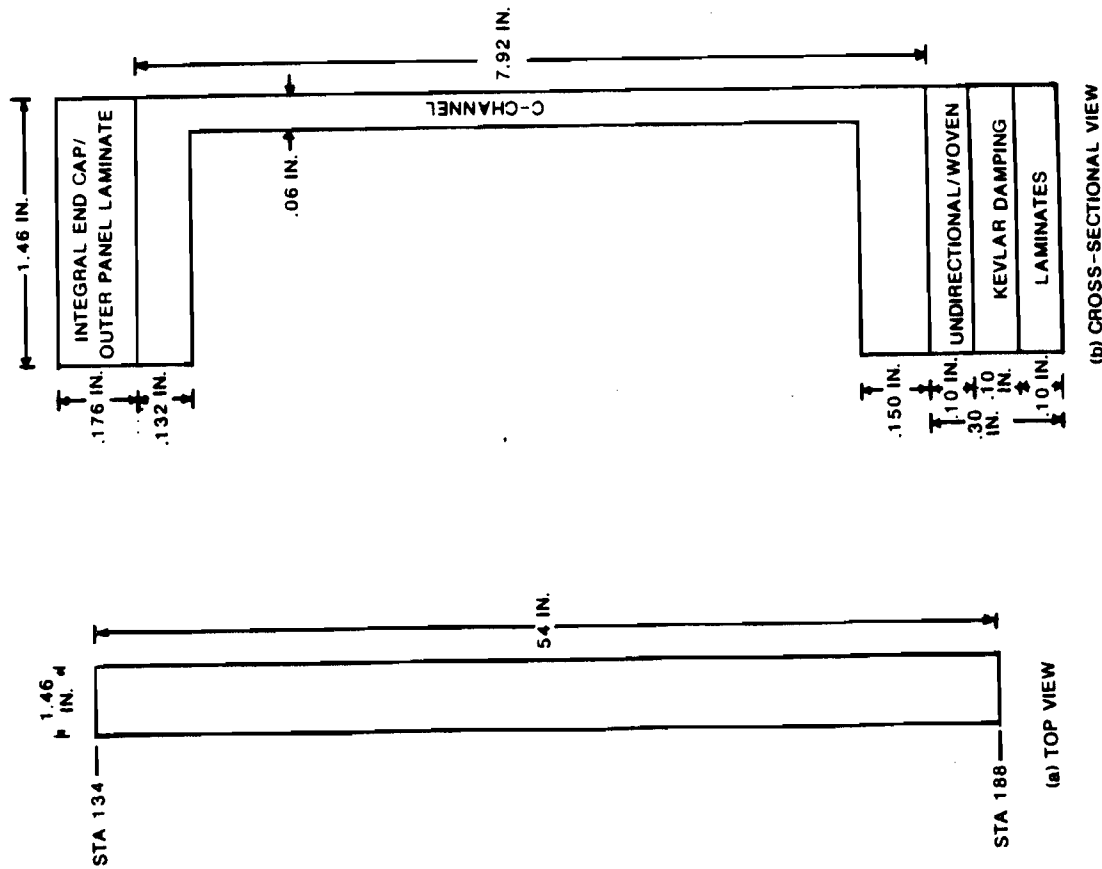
Top and Cross-Sectional Schematics of ACAP Test Beam
